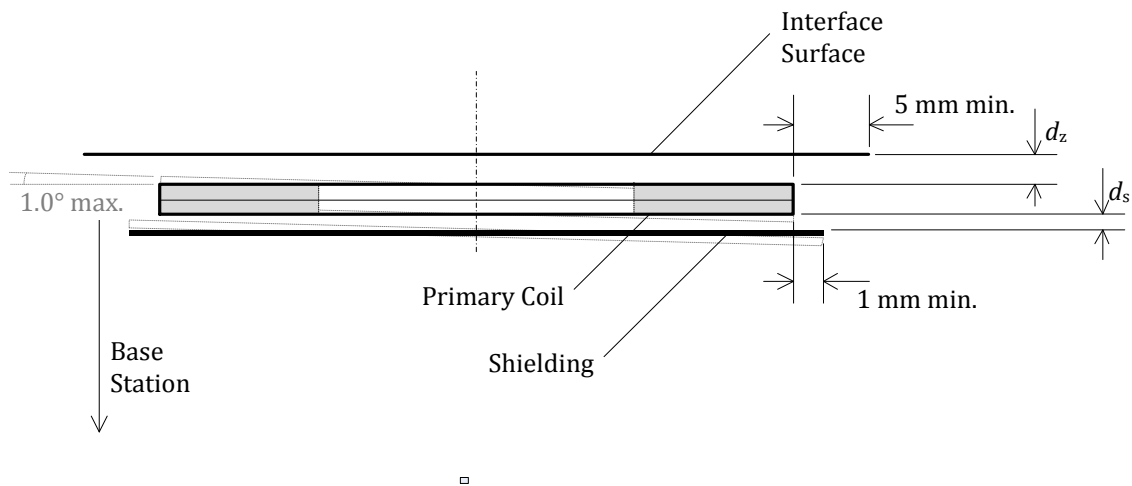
Primary Coil assembly of Power Transmitter design A15
